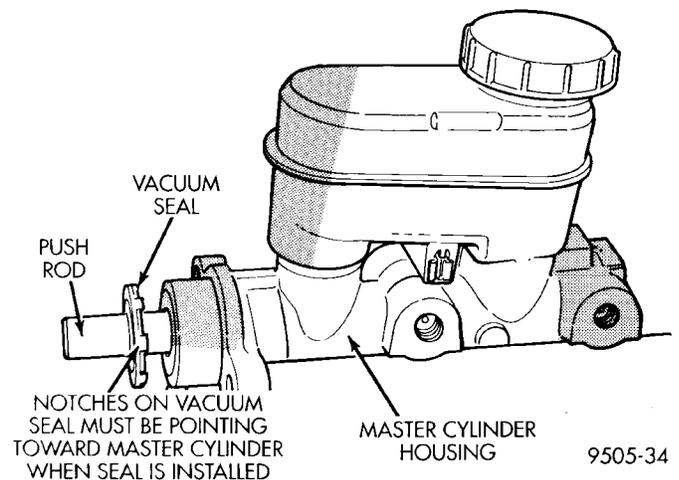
Installing Vacuum Seal On Master Cylinder Push Rod
